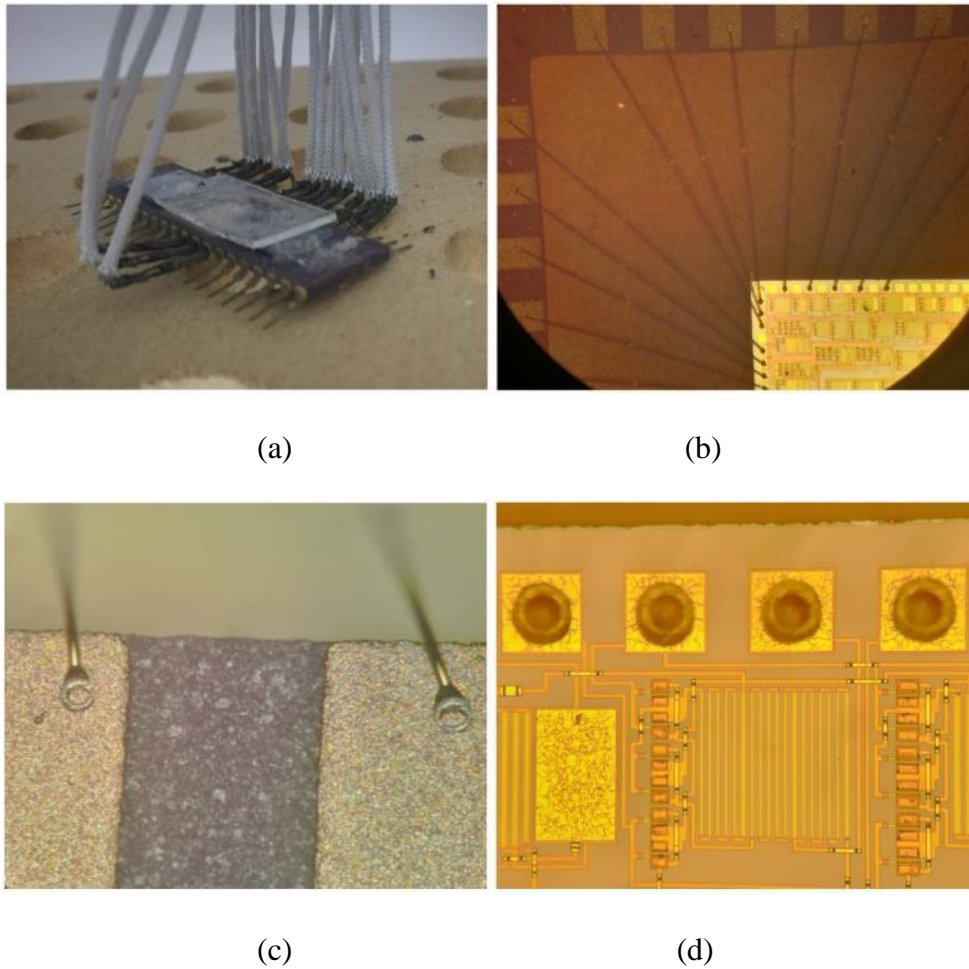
HT packaging (at 600 °C): (a) HT wires connected to a DIL ceramic package, (b) Bonding wires between the pads of the chip and the package, (c) Wire bonding terminals on the package pads, and (d) Ball bonding on the chip pads.
